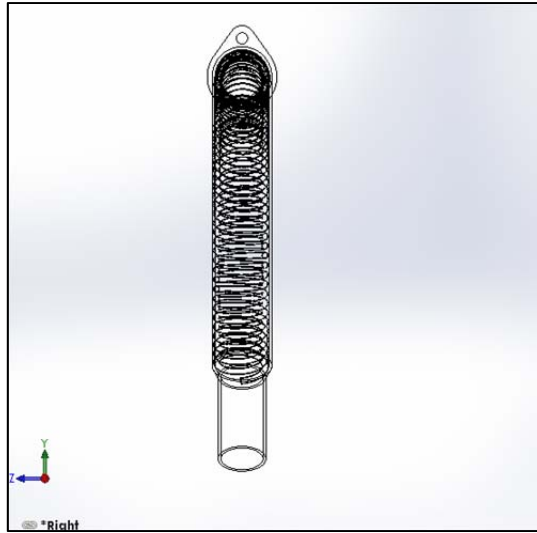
Wireframe view (right) of the heat exchanger along with the exhaust flange and the tail exhaust.
